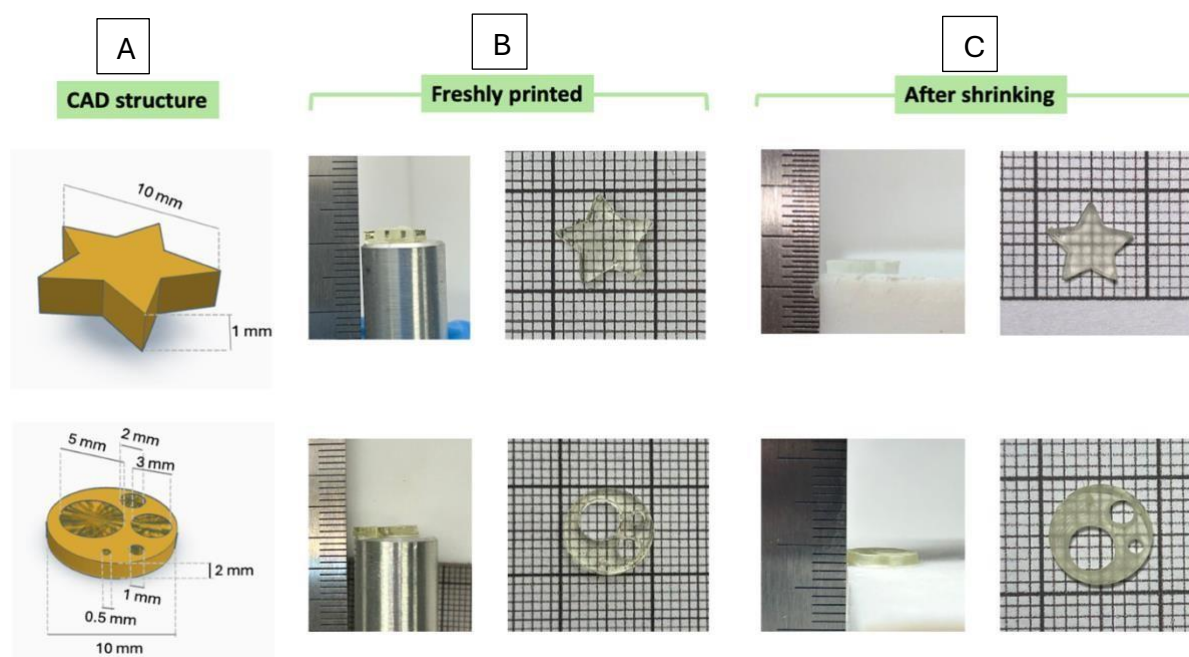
(A) CAD designs with pre-defined dimensions; (B) pictures of freshly printed parts; (C) pictures of printed parts after shrinking (all parts were left to dry for 72h). The same formulation containing PGI-DG-AC and PEGDA was used in all cases.
